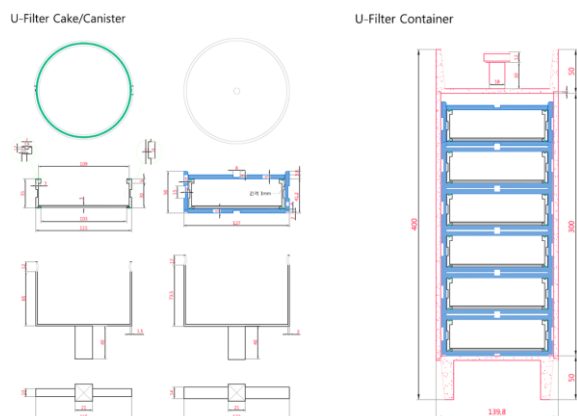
Drawing for uranium filter, filter canister and filter container with manipulator handling tool.
